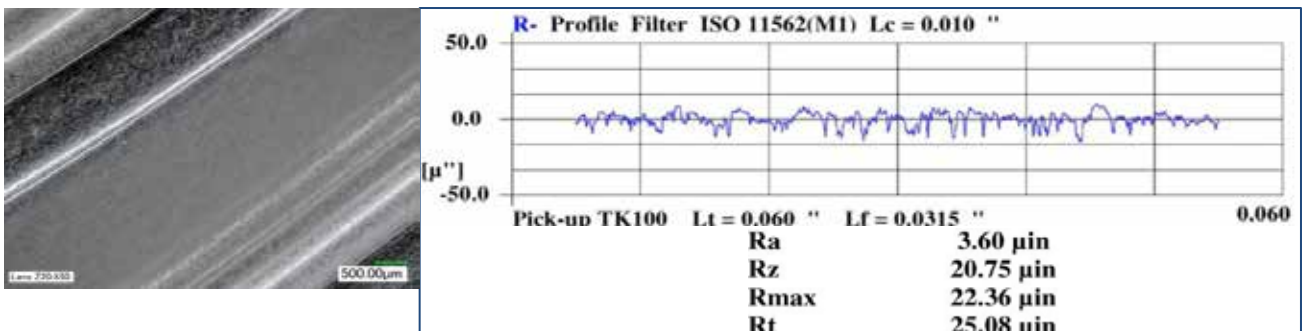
TEST CONDITION, Gear tooth image at 50x magnification and surface roughness measurement of ISF processed output gear 7-311320092 SN 00286-5389 used for LOL test.
